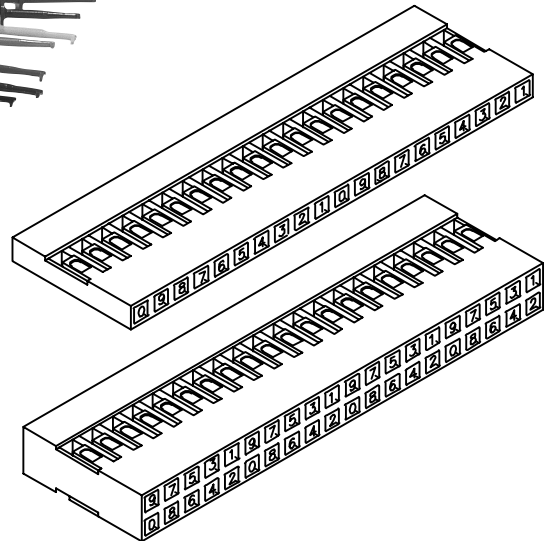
REAR VIEW OF HOUSING COLOR CODE:
